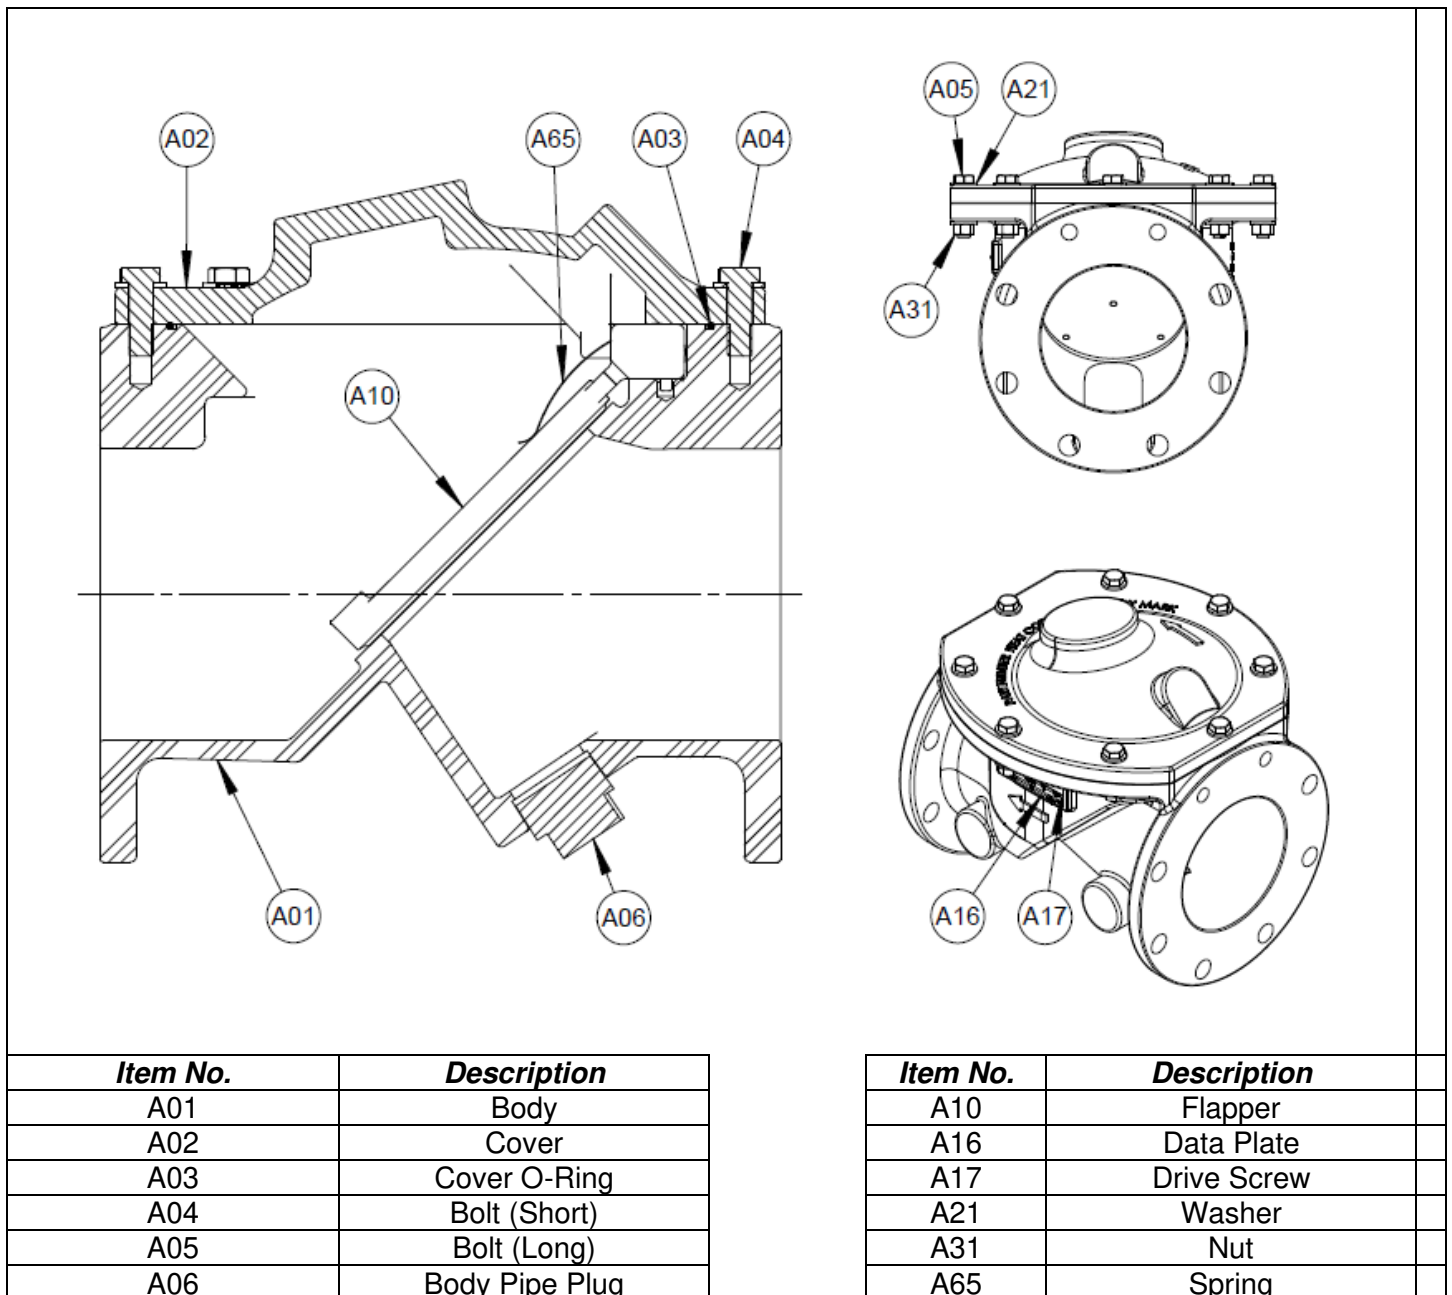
APCO FRF-100CF, Rubber Flapper Swing Check Valve
